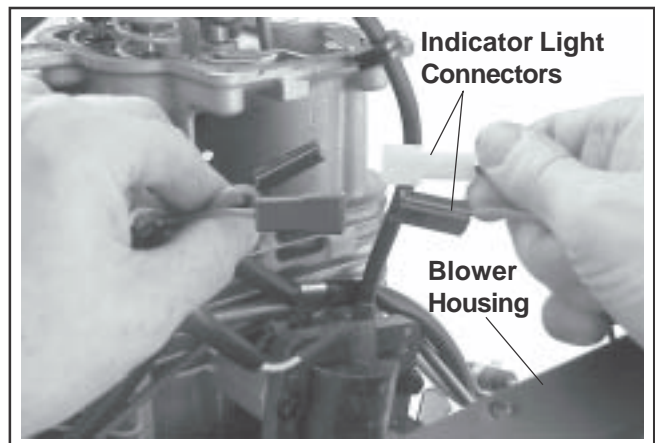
Disconnecting Indicator Light Leads and Removing Blower Housing.
